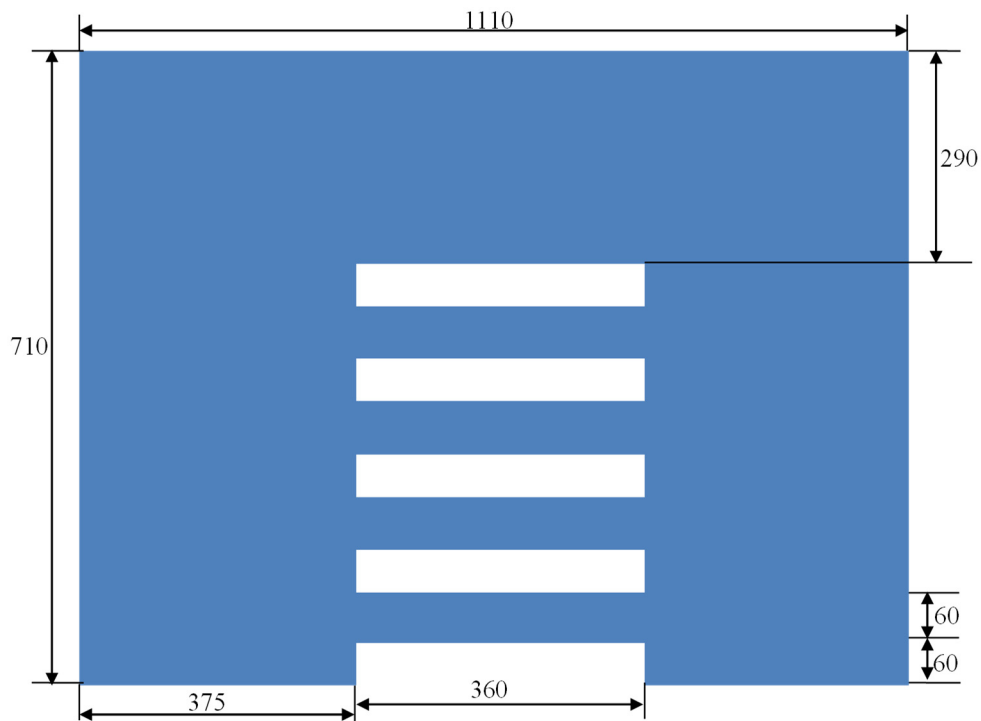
Schematic of nozzle plate (all dimensions in millimeters)
